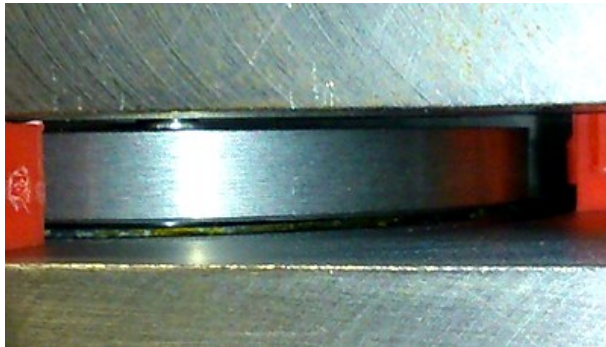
Completed HAMB - disc located between top and bottom actuator of the HAMB.
